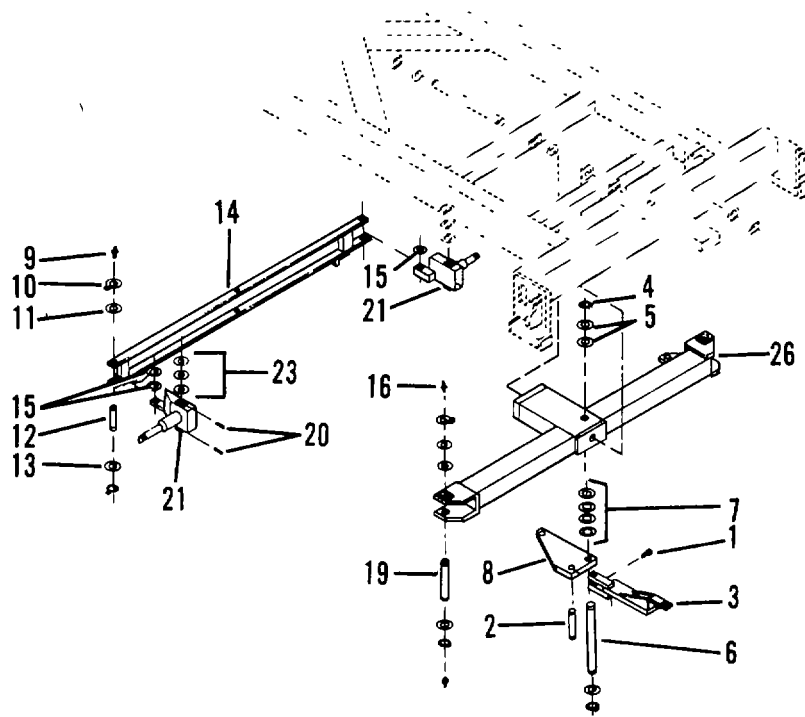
Steering Assembly (Sheet 3 of 3).
